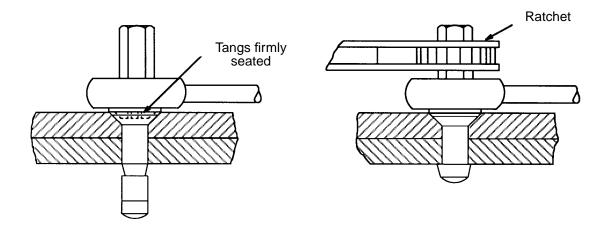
Installation of Jo-Bolts using Hand Tool Assembly
